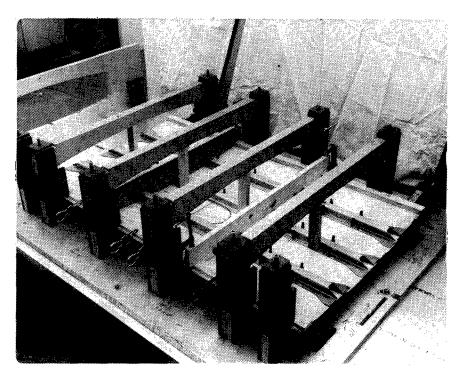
Assembly Fixture used to Attach Stringers to Skin.
